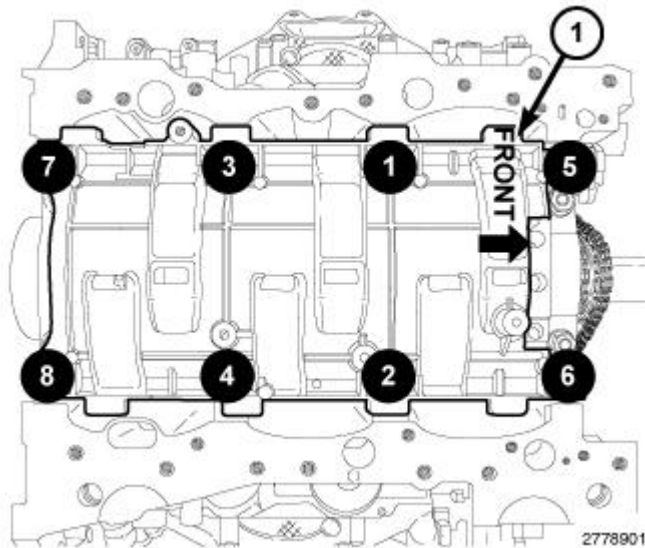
Windage Tray With Main Bearing Cap Bolts Installation Sequence
